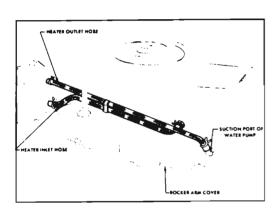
Heater Hose Routing V-6 and V-8 Engine
